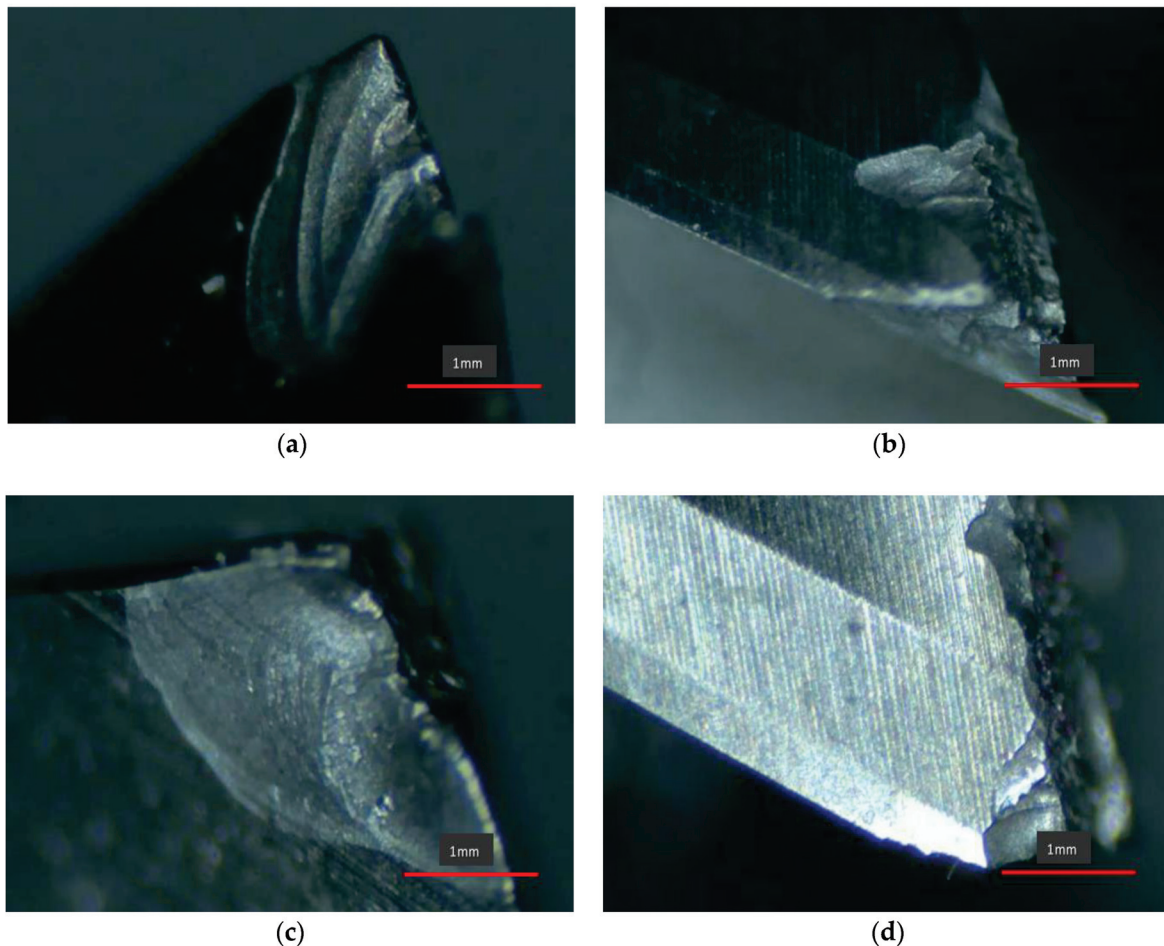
Wear morphology of tool. ($n = 300$ r/min, $a_p = 0.4$ mm, $f_z = 0.4$ mm/r). (a) Wear morphology of flank face. (b) Wear morphology of rake face. (c) Layered flaking. (d) Tool chipping.
